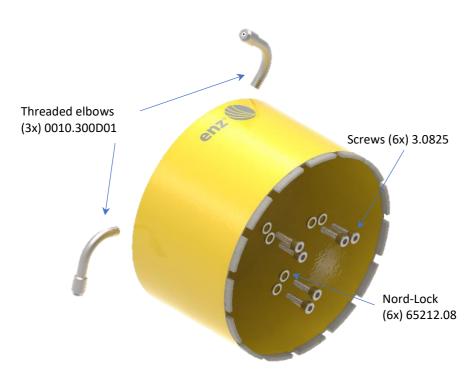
Exploded view of 10.xx0D-KS200 diamond crown drill bit
